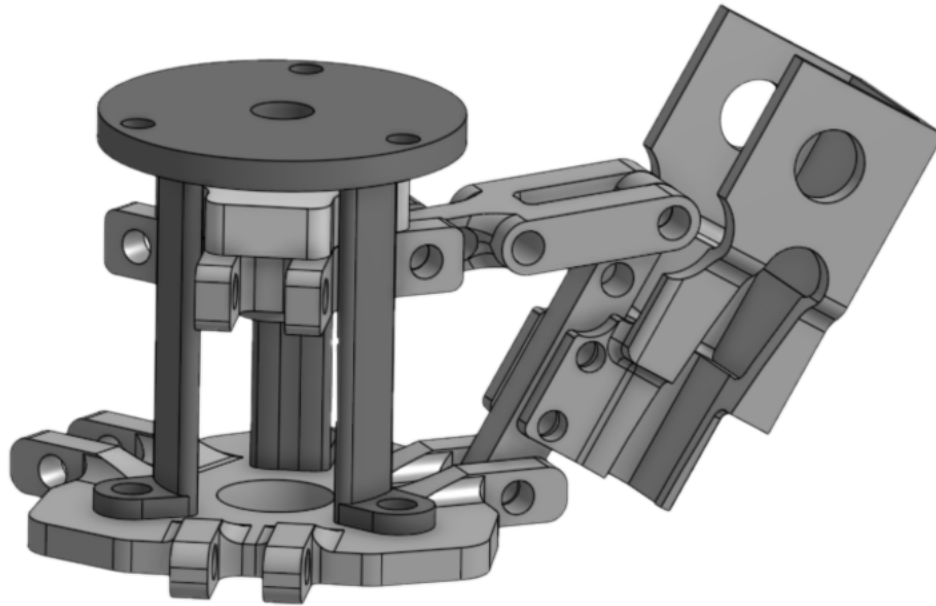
Actively limited passive suspension segment CAD model with single wheel arm (without lead screw or compression spring)
